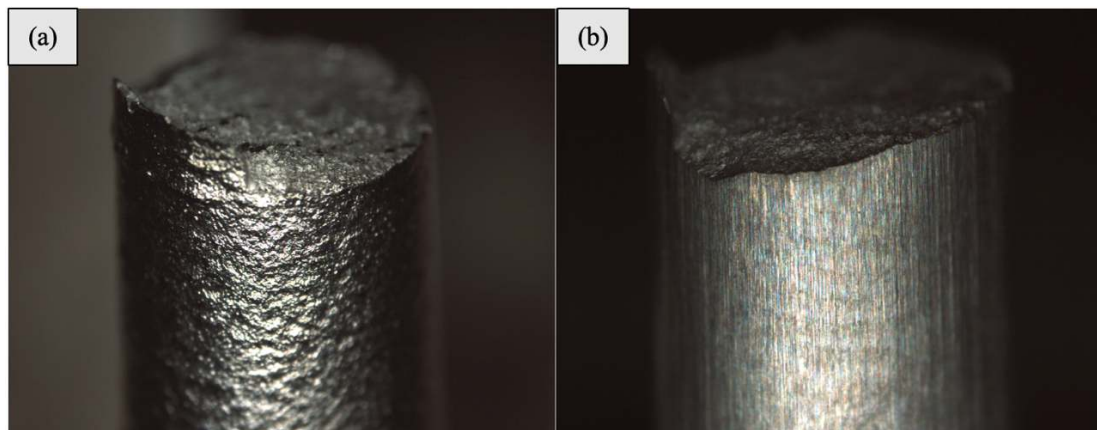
Sand blasted + pickled specimen, (a), and machined post condition specimen (b), fatigue fracture surfaces
